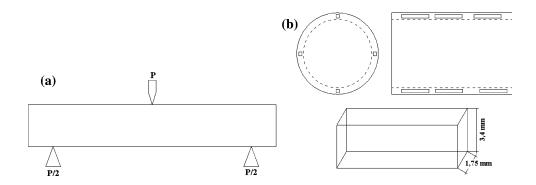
(a) Three-point bend set-up; (b) Nodular cast iron, casting pipe, and samples
